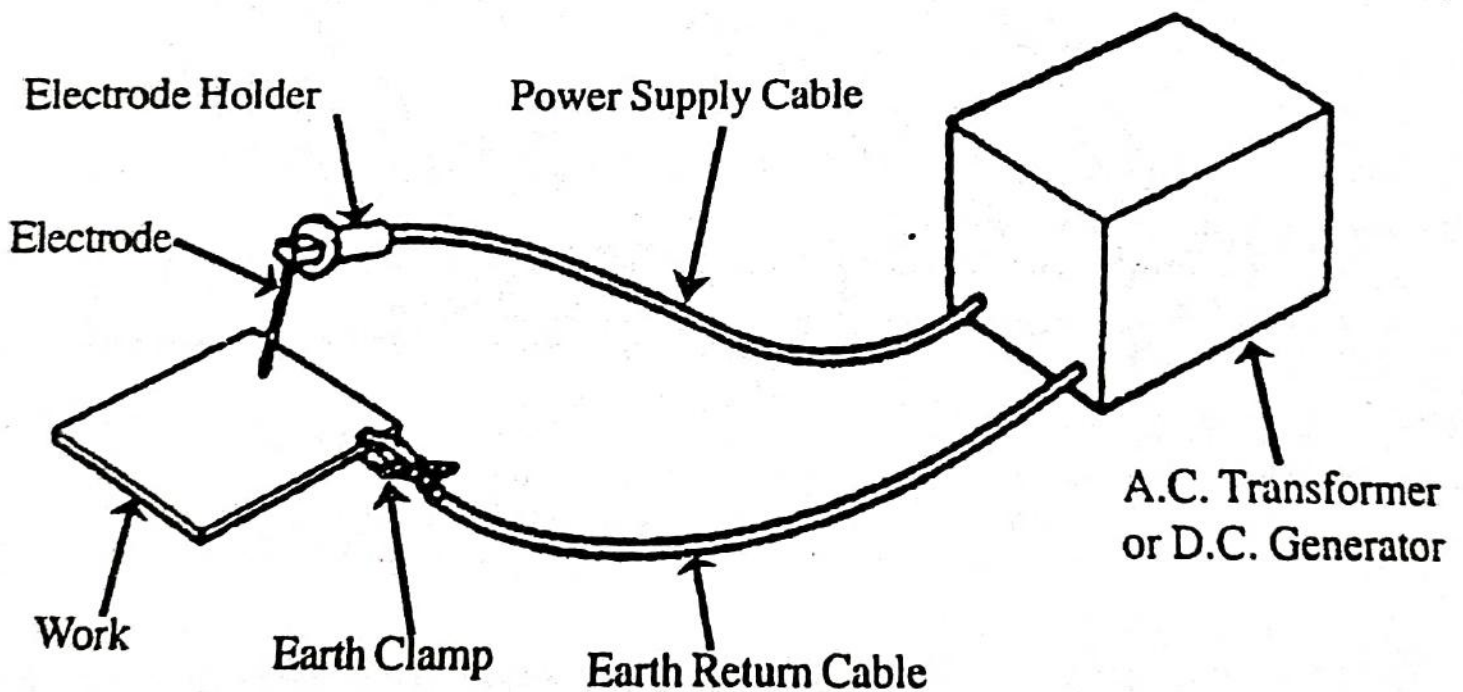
Manual Metal Arc Welding Equipment
